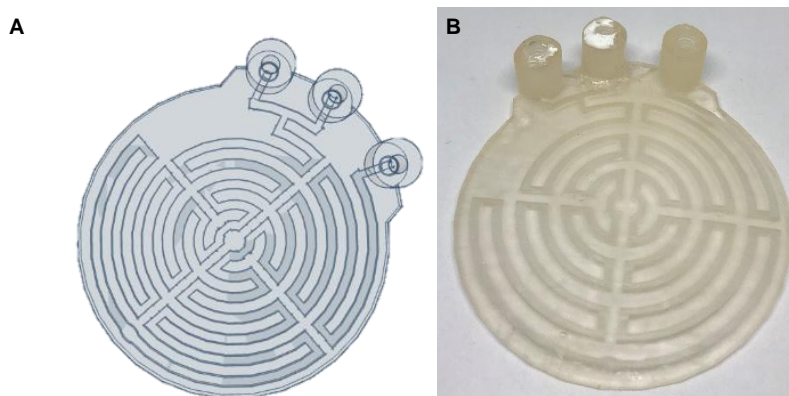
A) CAD drawing of circular hotplate reactor design 8; B) Printed circular hotplate reactor design 8.
